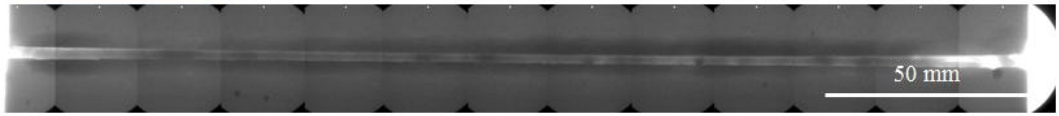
RT result of weld bead having 3mm gap and filled with slag pieces - 1
